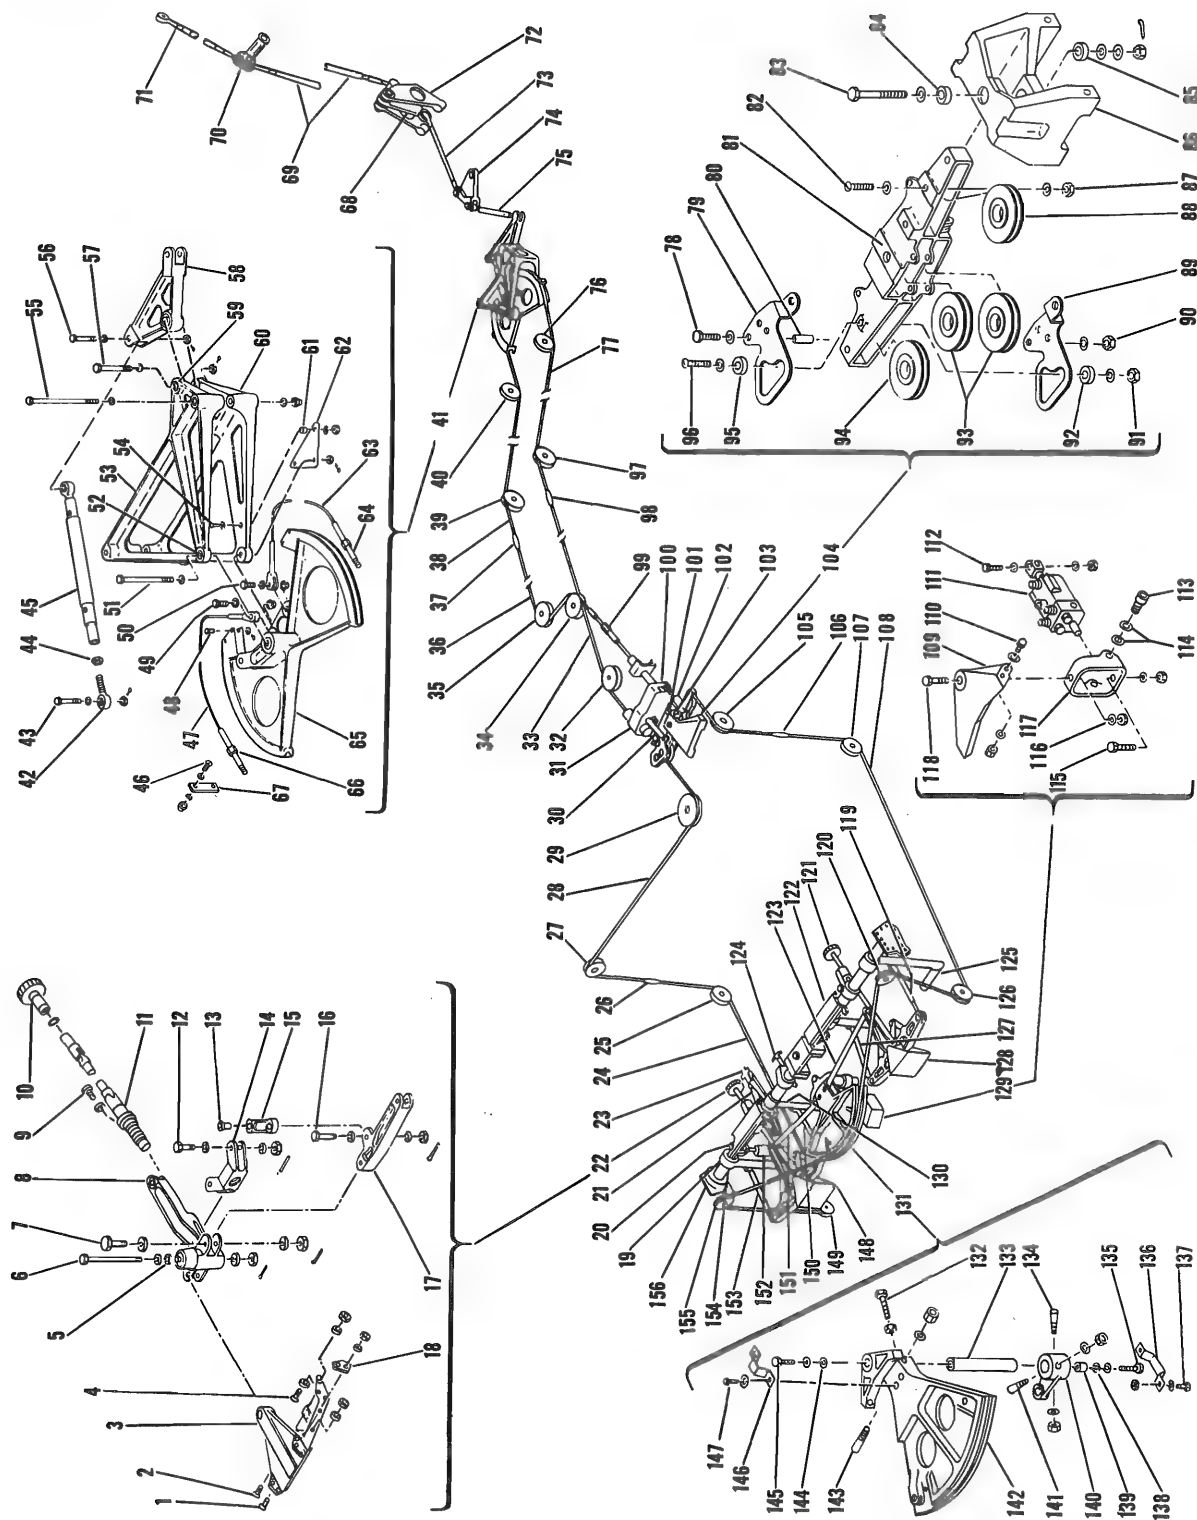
Tail Rotor Flight Controls System (Sheet 1 of 2)
